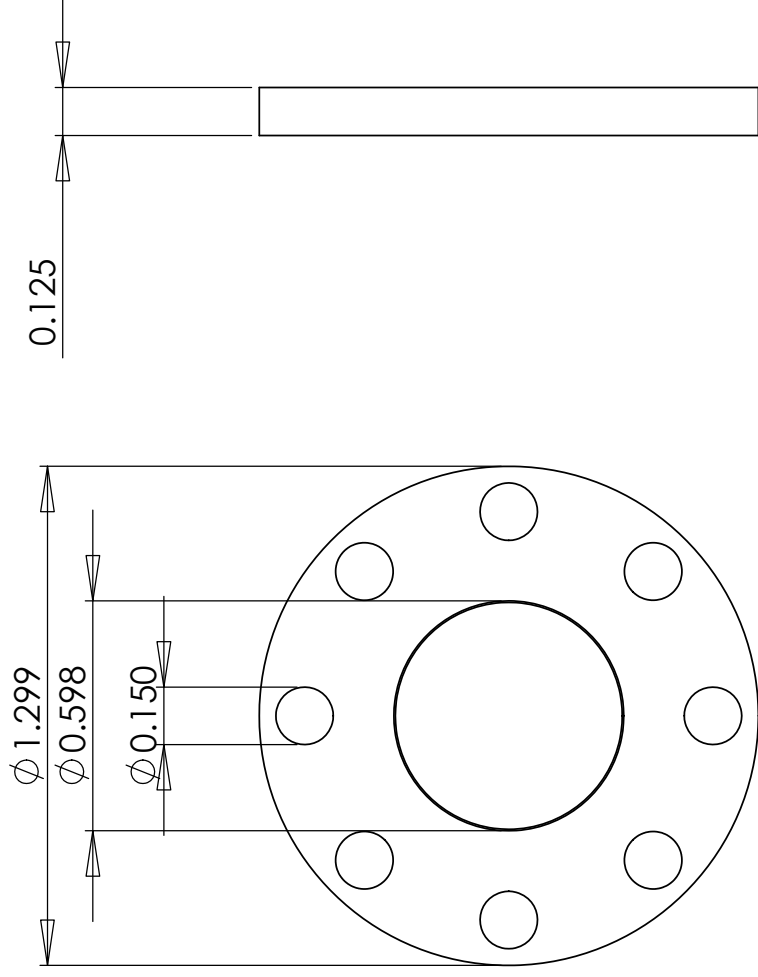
Mechanical drawing of interlocking split ring design. Any unspecified dimensions are based on the starting part, a standard miniflange rotatable bolt holding ring. Built by Sharon Vacuum (contact [larry@sharonvacuum.com](mailto:larry@sharonvacuum.com)). Dimensions are inches.
